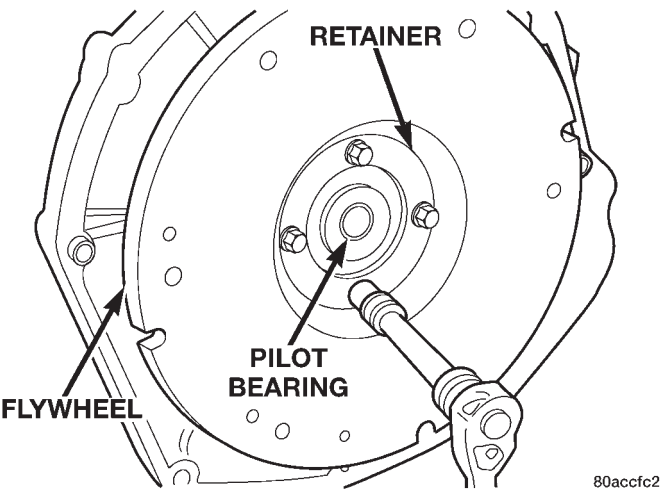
Pilot Bearing Retainer Bolt Removal/ Installation
